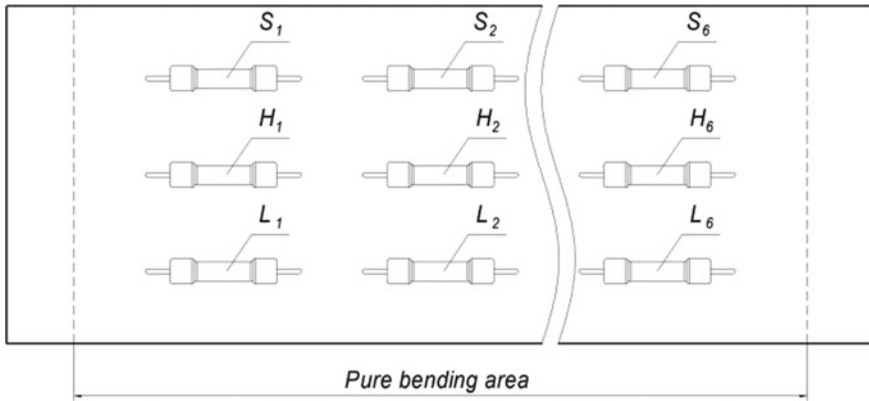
Resistors layout on the PCB: surface mount technology (S_j); low through-hole technology (L_j) and high through-hole technology (H_j)
